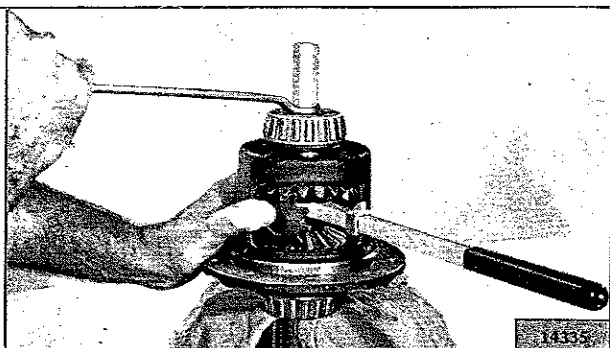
STARTING PINION MATE GEARS INTO CASE
